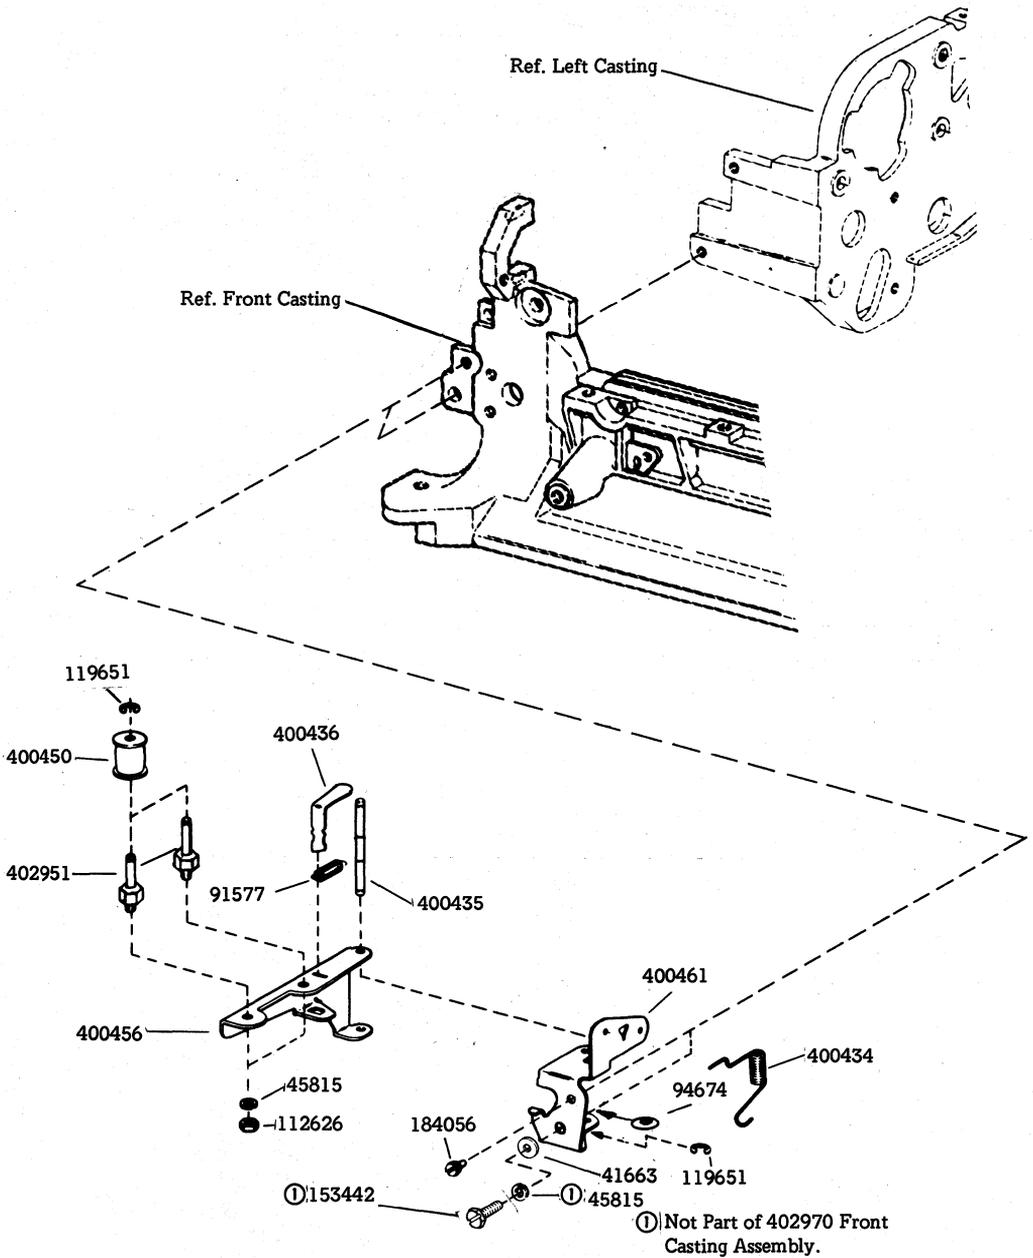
Front Casting Assembly (Friction Feed - 40P102)
